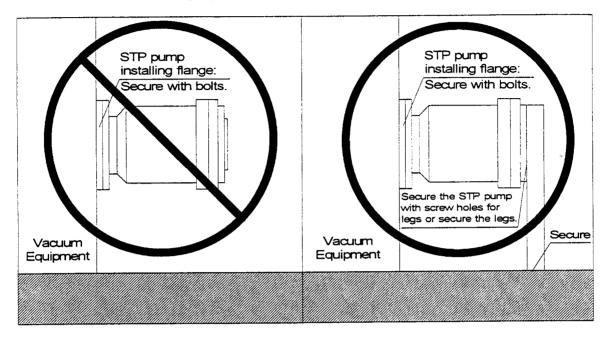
How to Install the STP Pump Horizontally or Slanted
